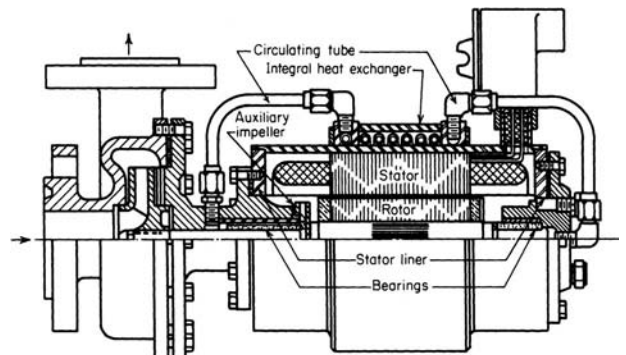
Canned-motor pump. (*Courtesy of Chempump Division, Crane Co.*)
